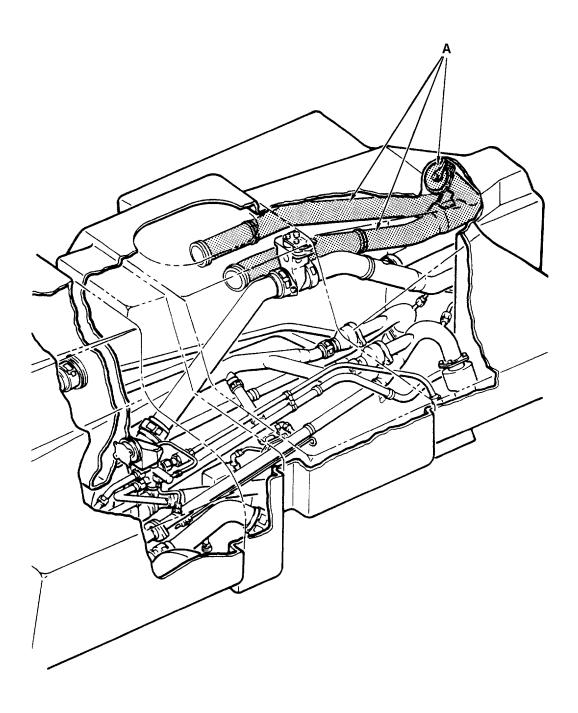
No. 4 Fuel Tank Dive Vent Check Valve (5VAP555) (Sheet 1)
